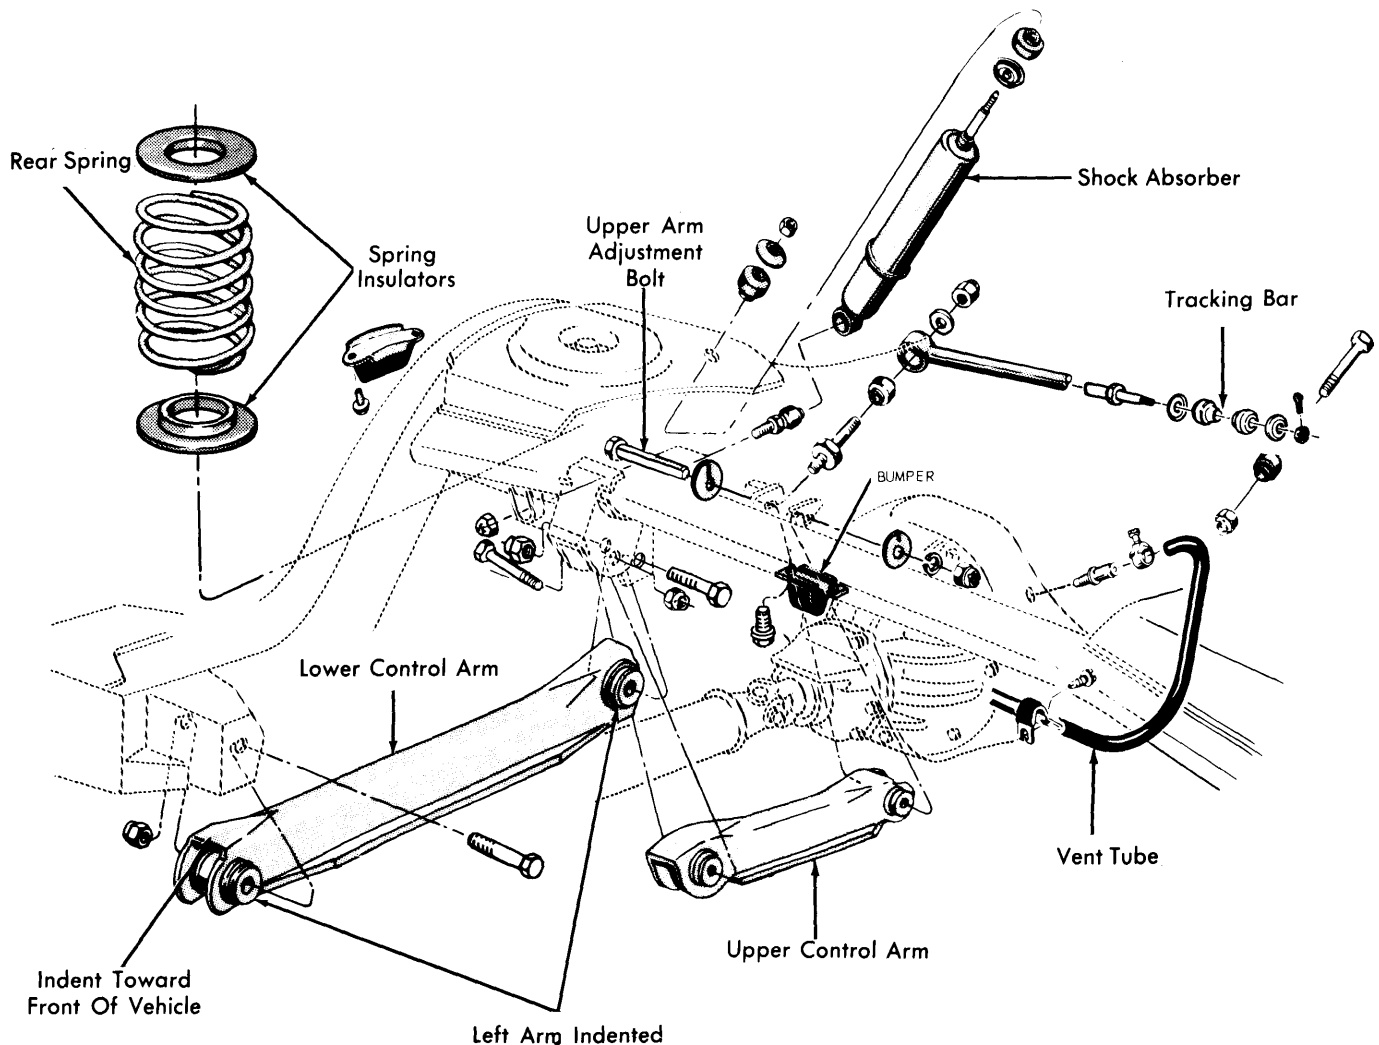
Exploded View of Ford Coil Spring Type Rear Suspension Assembly
